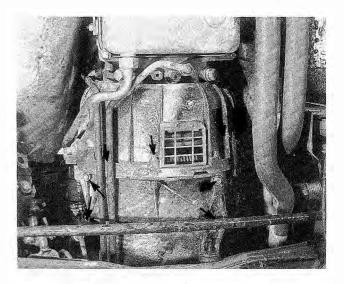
Bellhousing reinforcement plate mounting bolts (arrows) on 6-cylinder engine. One Torx[®] head bolt is not visible.
